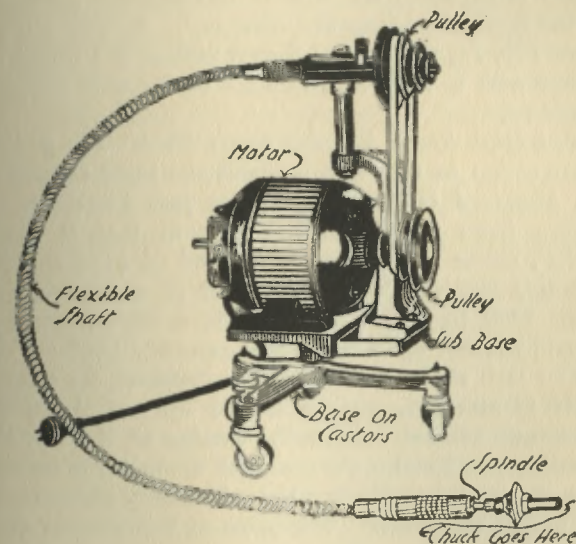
THE DRIVER PORTABLE FLEXIBLE SHAFT UNIT
